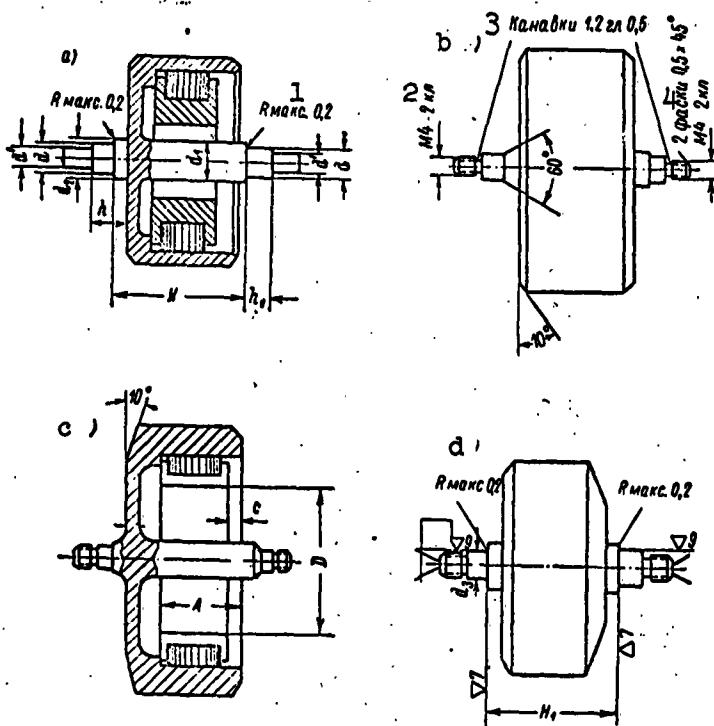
Sequence of final machining of the rotor. 1) Max; 2) class 2; 3) grooves, 1.2 × depth 0.5; 4) chamfers.
